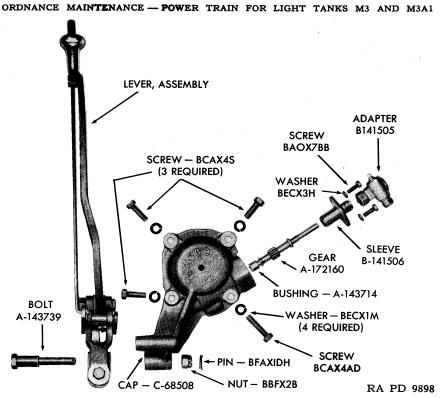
Parts of gear shift lever and output shaft rear bearing cap—exploded view.
